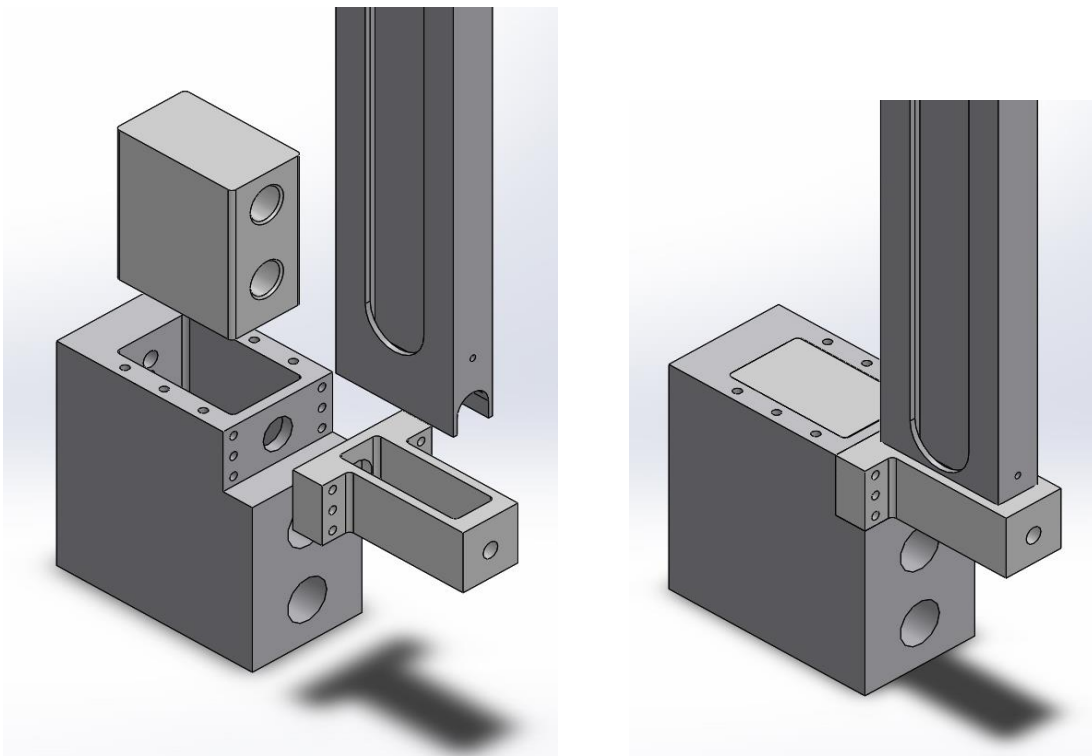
CAD Drawing of the Addition of a Sample Magazine and Magazine Receiver to Original Sample Injection/Ejection Valve (Exploded and Assembled View Provided).
